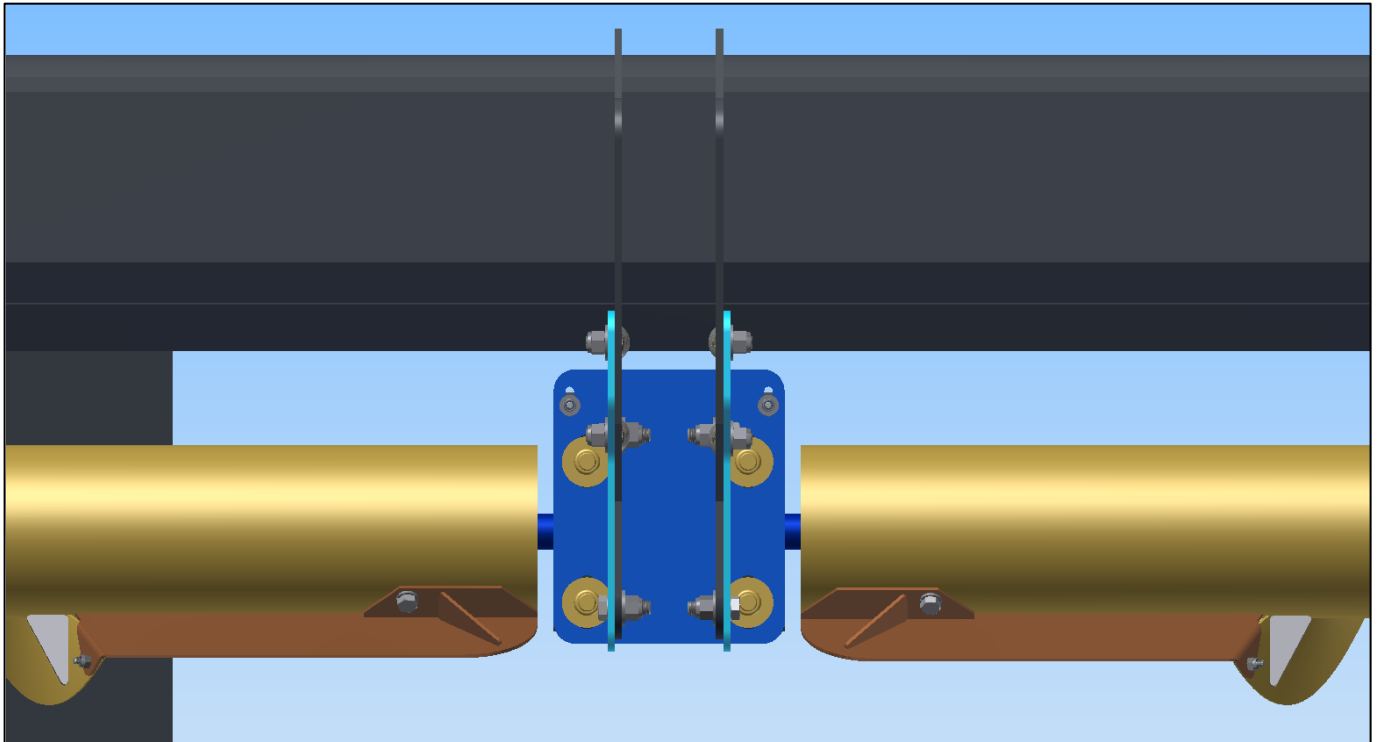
CENTER AUGER MOUNT (TOP VIEW)
